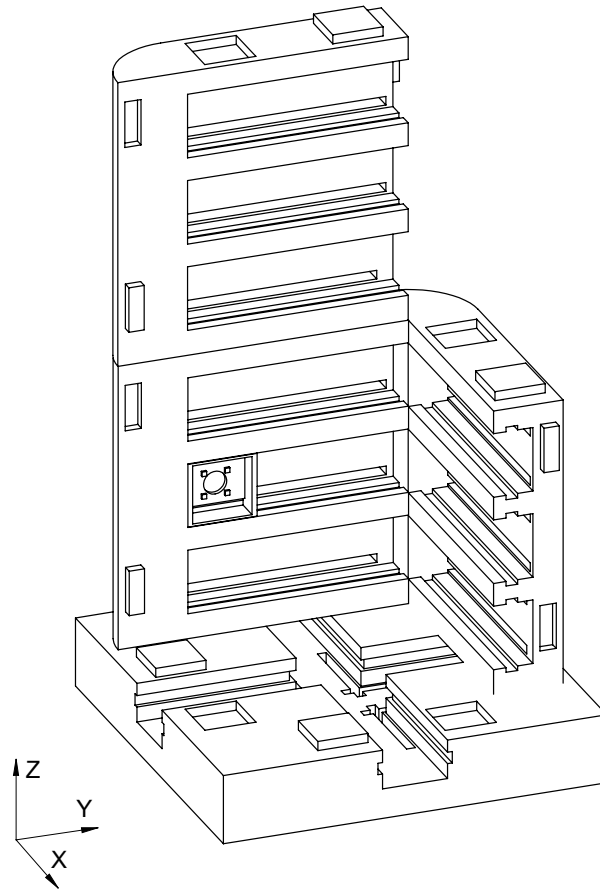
3D drawing of the full measurement system, including three horizontal walls, the bottom plate and one magnetometer holder.
